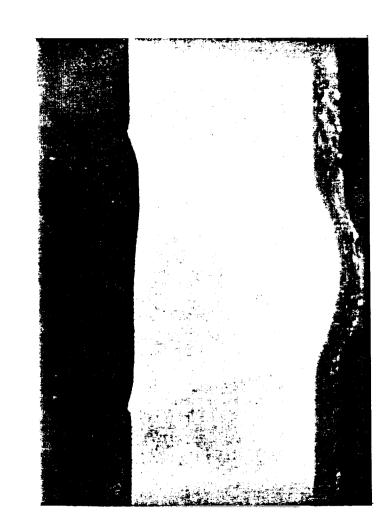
B Weld made with 500 ppm Hydrogen in shield. Cover. Back.
